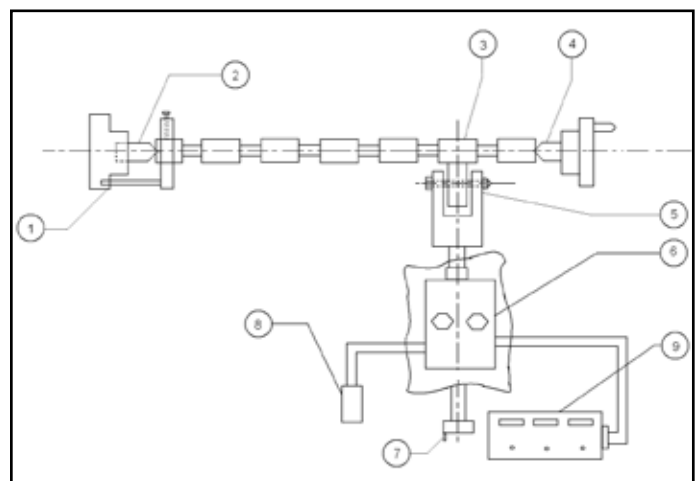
Experimental Set Up With Roller Burnishing Tool
